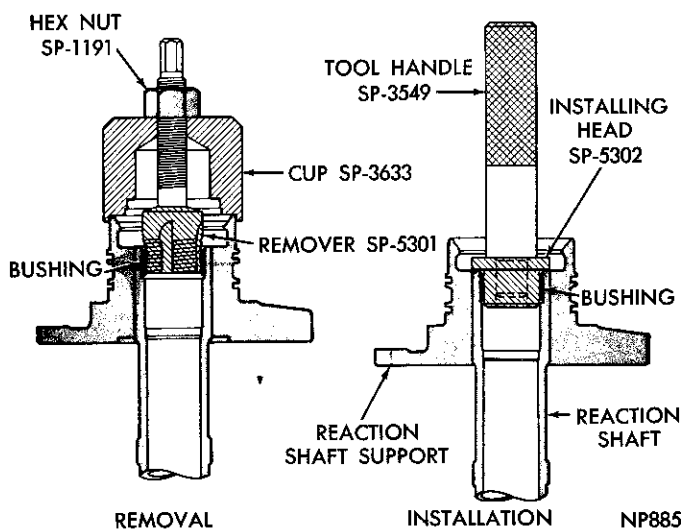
Replacing Reaction Shaft Bushing (A-727)
